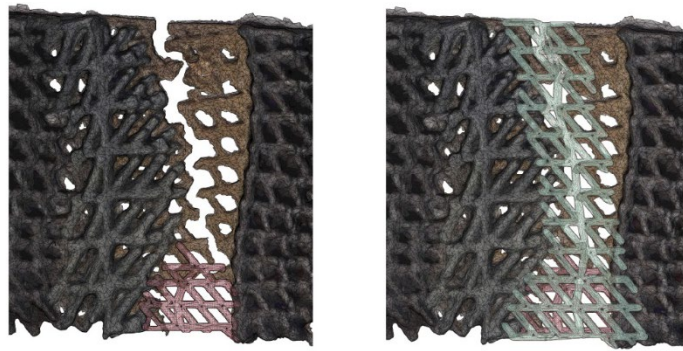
Diagrams illustrating the patch geometry where parts are missing (left), and the stitching geometry which connects the two parts of the cracked panel (right)
